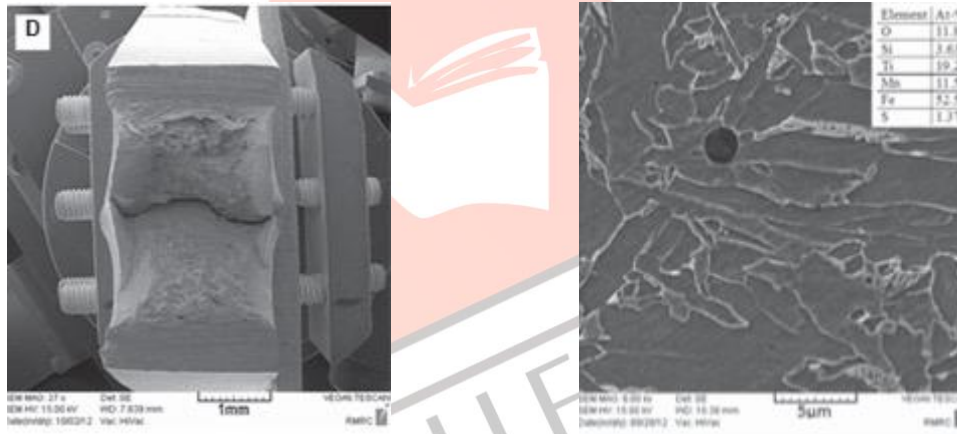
The macroscale fracture surface of Charpy impact test samples at -30C .
